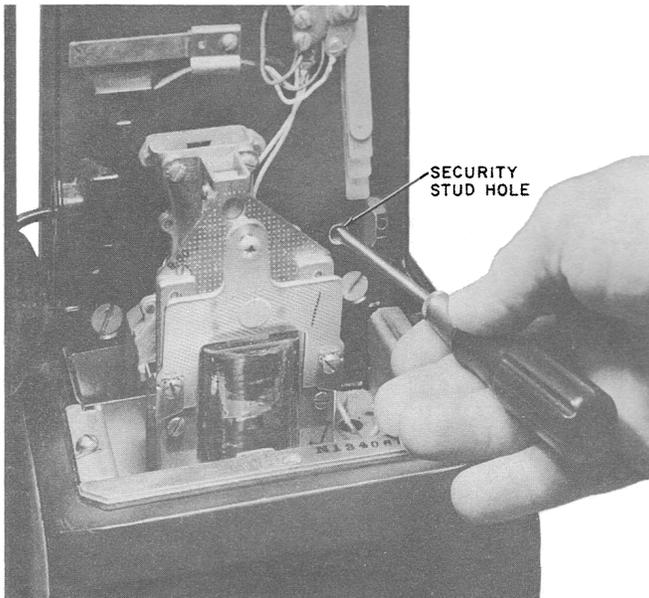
Method of Determining if Mounting Surface is Equipped With Four Keyhole Slots
